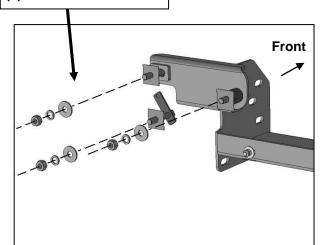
Insert (1) Bolt Plate through lower outer hole in steel bumper bracket. Thread Plastic Retainer onto Bolt Plate to hold in place. Driver/left side pictured
